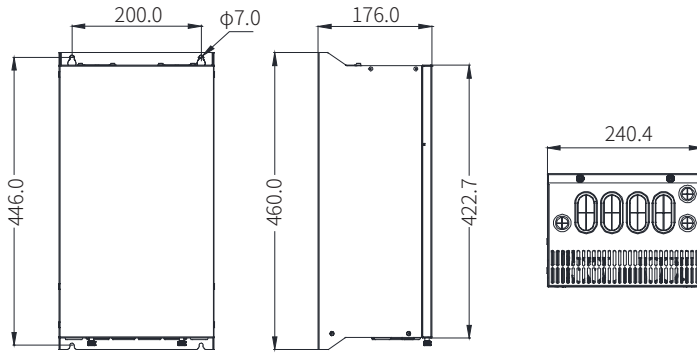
Braking unit outline and installation dimensions (unit: mm)
